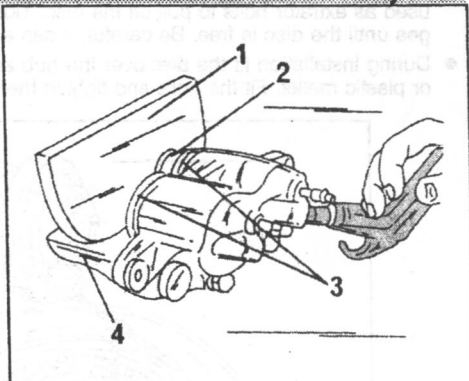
Removal of a caliper piston. Insert the piece of hardwood (1) into the caliper opening (4) to protect the piston (2) during removal. Each piston has a dust seal (3).
